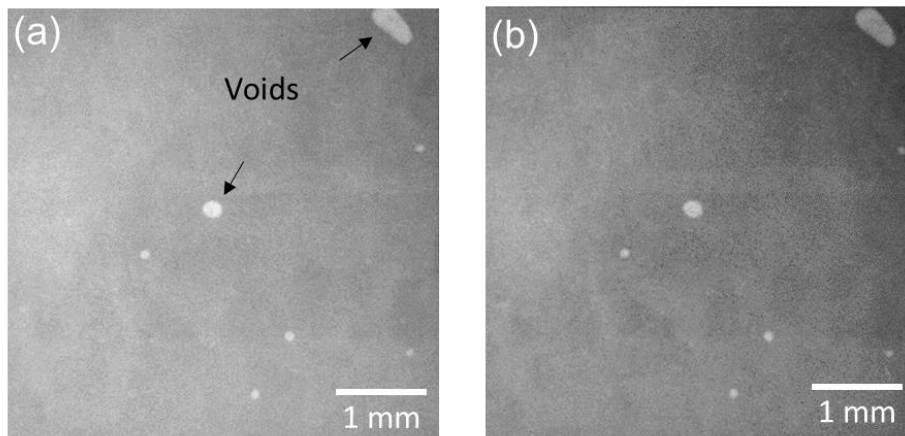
Micro-focused X-ray inspection results of Ag sinter joint in devices before (a) and after (b) PCT tests.
